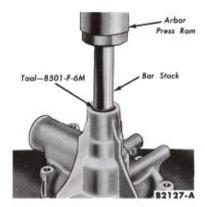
Pressing Seal Out of Pump Housing—Comet
